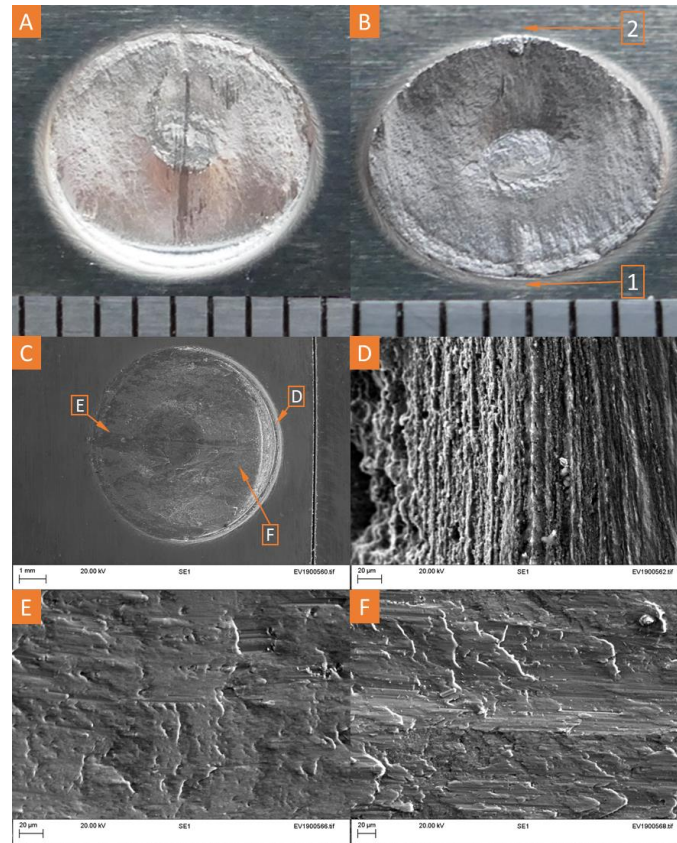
Fracture surfaces of RFSSW AA2024-T3 weld condition W3 (RS = 1000 rev/min; PD = 2.4mm):
